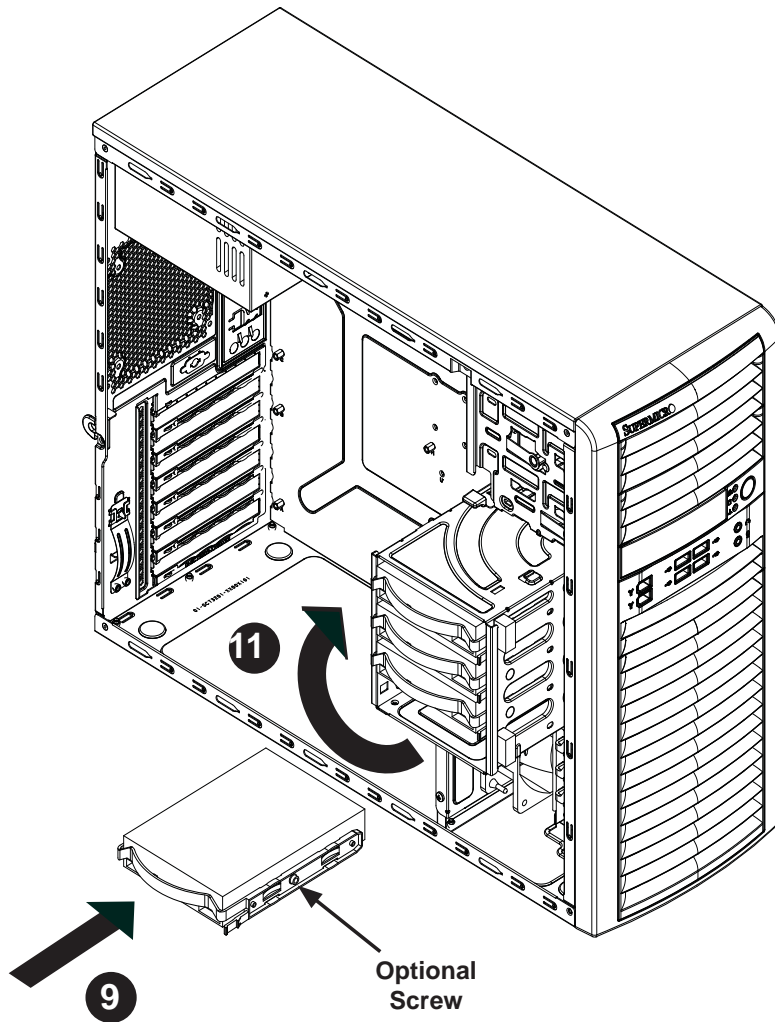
Installing a Hard Drive Carrier into the Hard Drive Cage
